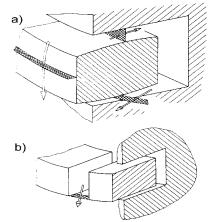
Exhaust parts on piston ring [14]: on sealing surfaces b) on piston ring joint
